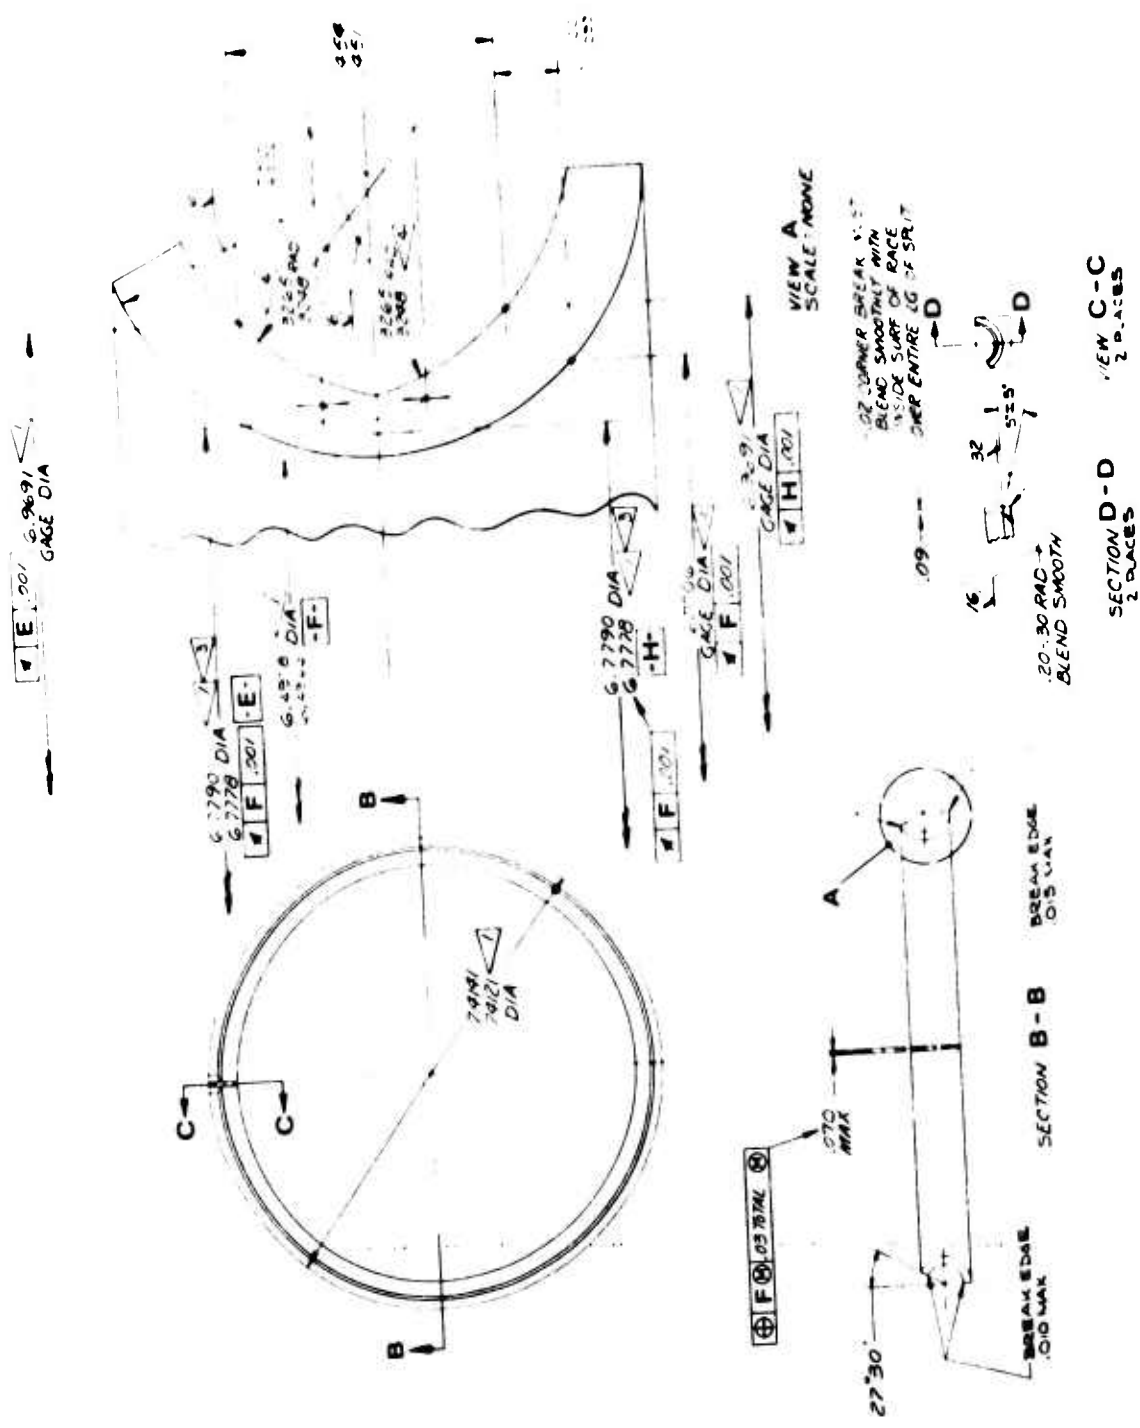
GOTHIC-ARCH INNER BEARING RACE INSERT DETAIL DRAWING
